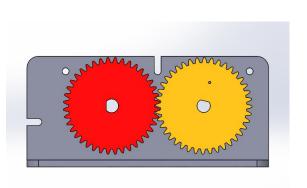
Mark 1 gearbox: both motor gear (red) and driver gear (orange) with 30 teeth.
